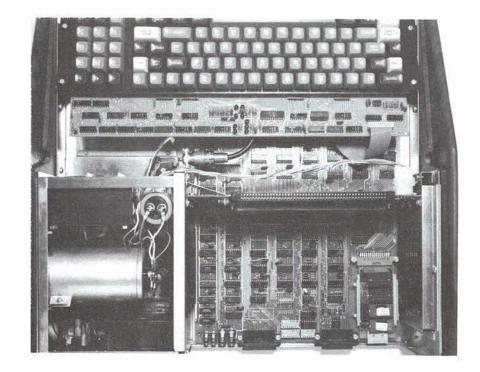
Backplane board (Sol-BPB) installation. Rear of Sol is at bottom and Sol-BPB is to right of power supply subchassis in line with C8 and transformer.
